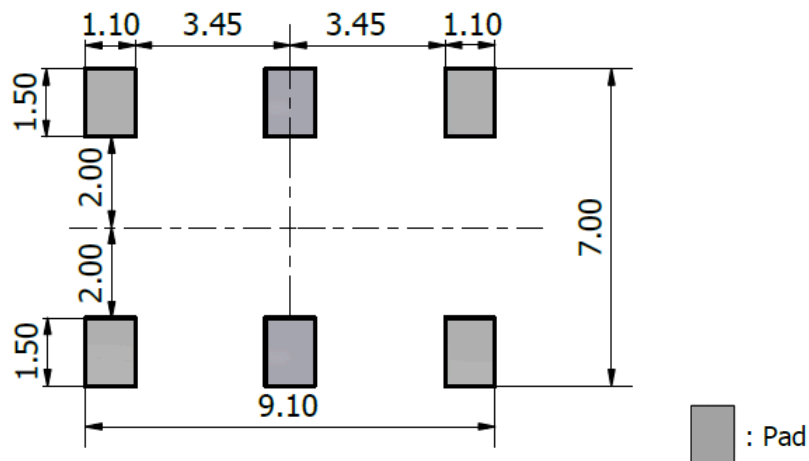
Example Land Pattern for CSS-10S (Unit: mm)
